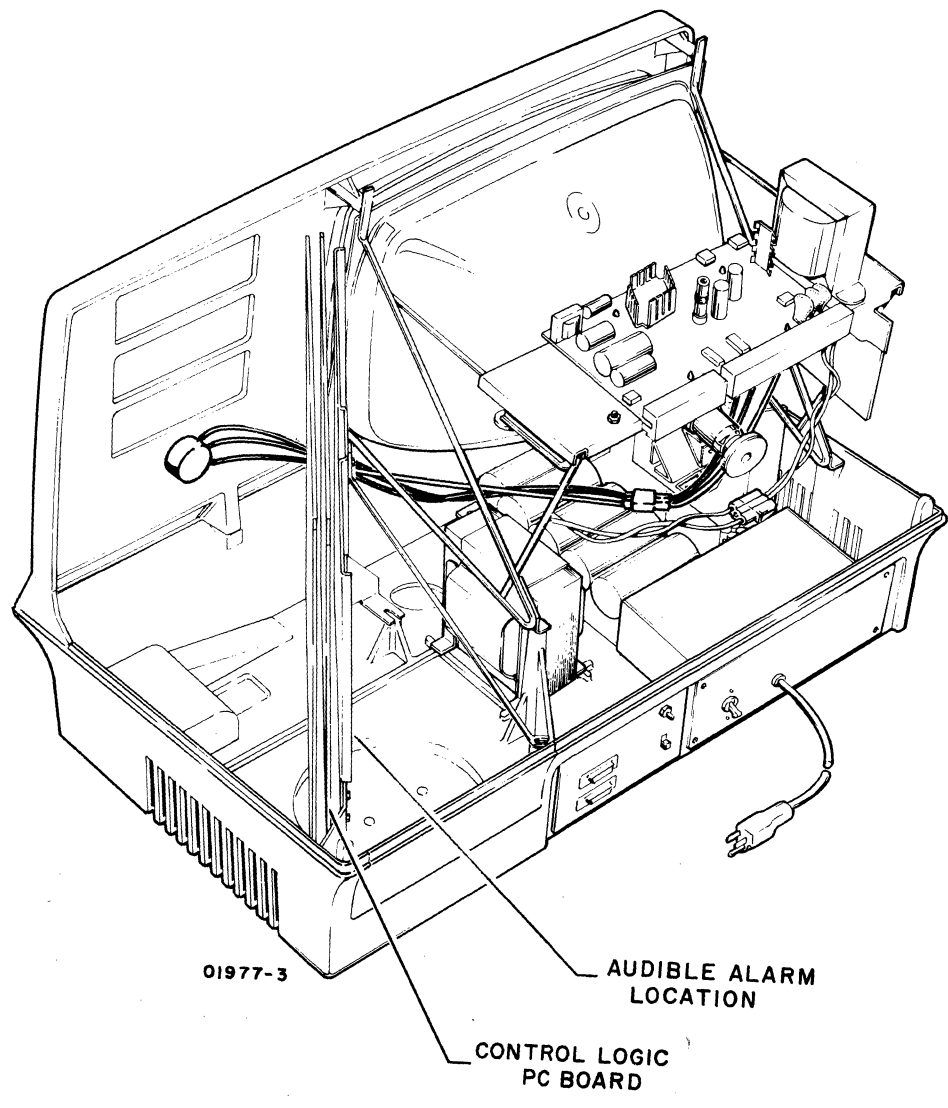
Location of Audible Alarm and Control Logic PC Board
